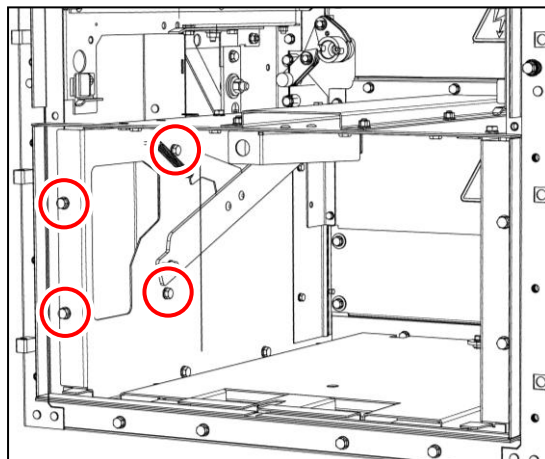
4 bolted joints on metal cover in voltage transformer compartment
